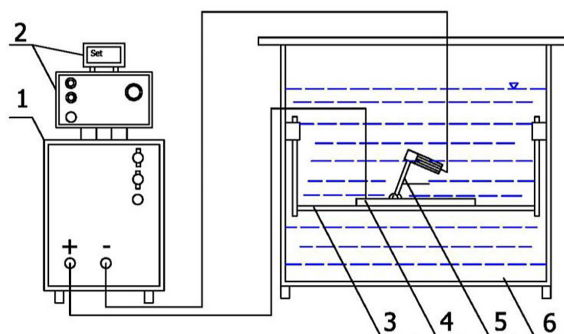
Scheme of the underwater welding test stand: 1 – welding machine, 2 – control panel, 3 – welding table, 4 – specimen, 5 – electrode, 6 – water container [32]
